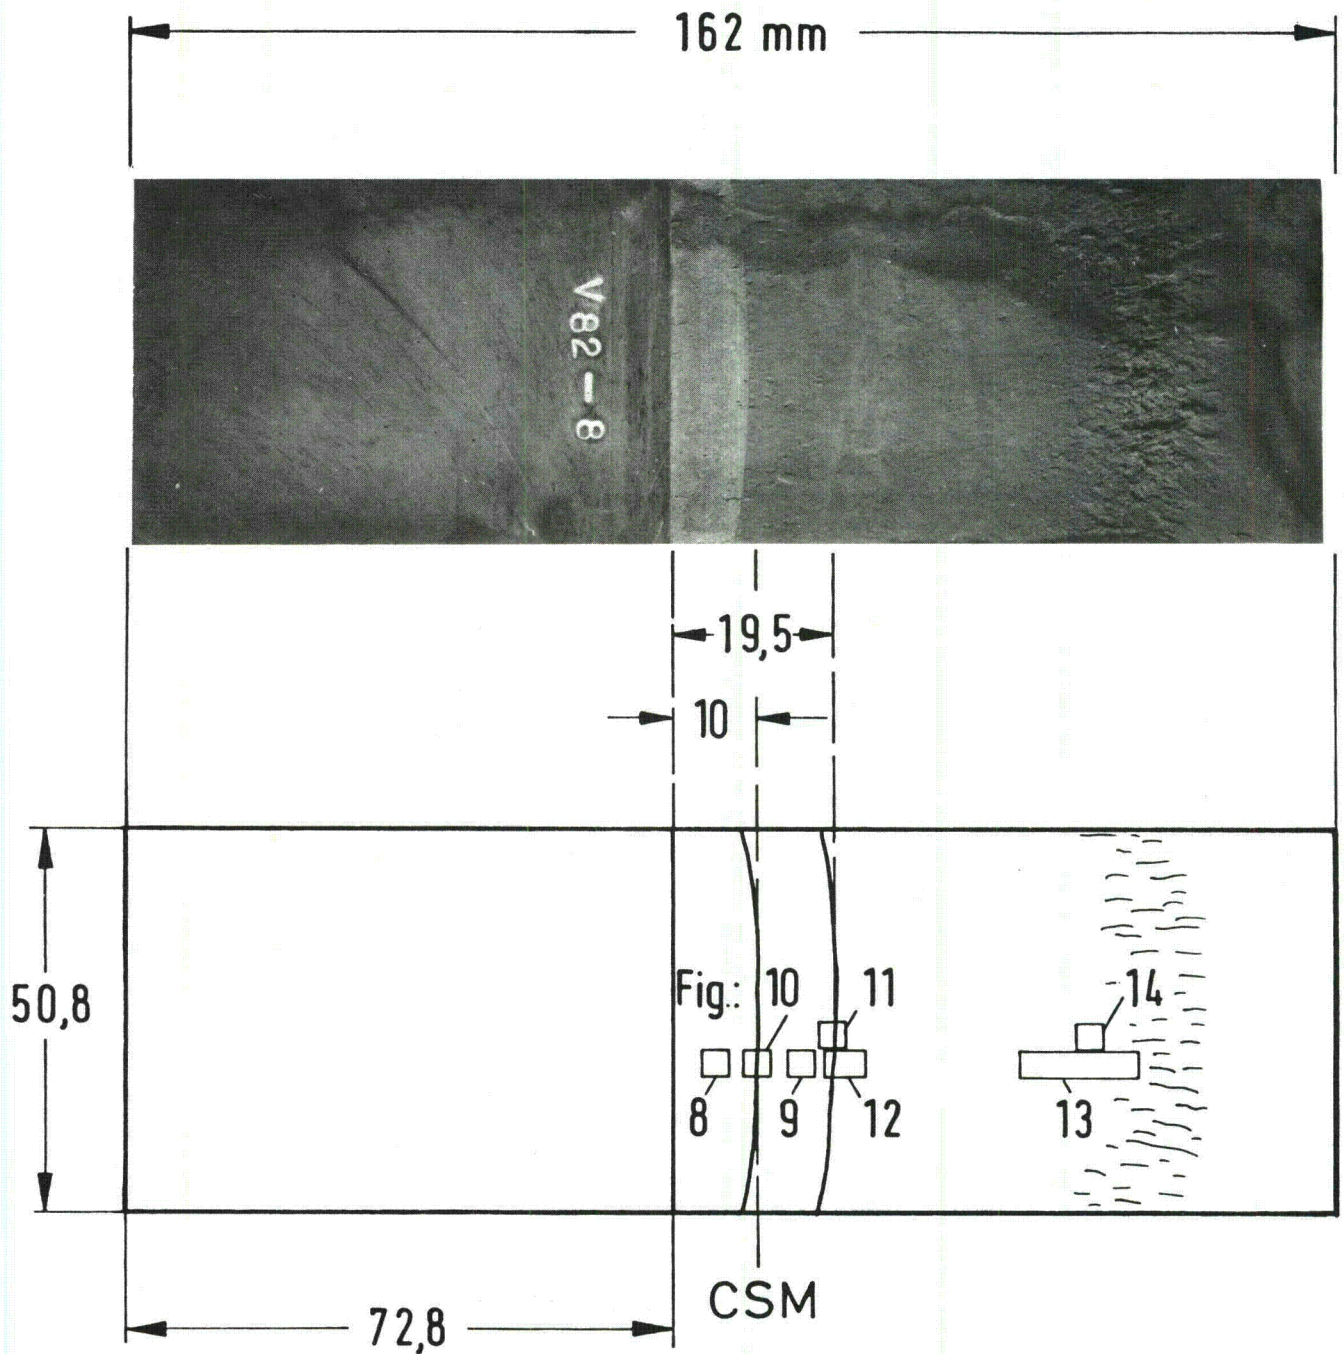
Macro fracture surface of specimen V 82-8 (top) and location of fractographic pictures (bottom)
